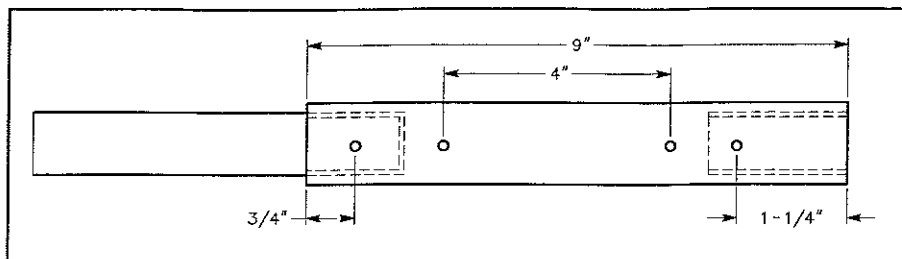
Coil-form hole locations. The 40-meter form is shown; the 80-meter form is similar except that it is 11 inches long and the holes for the coil are 6.3 inches apart.
